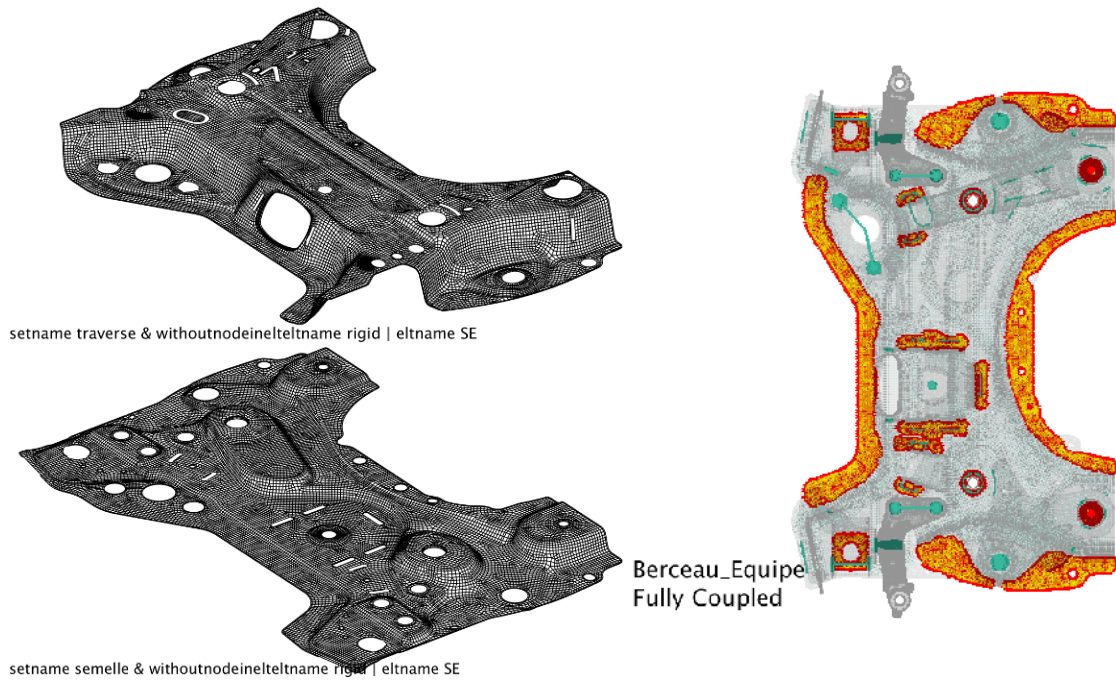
Engine cradle parts to be welded (left) and potential contact area (right).
